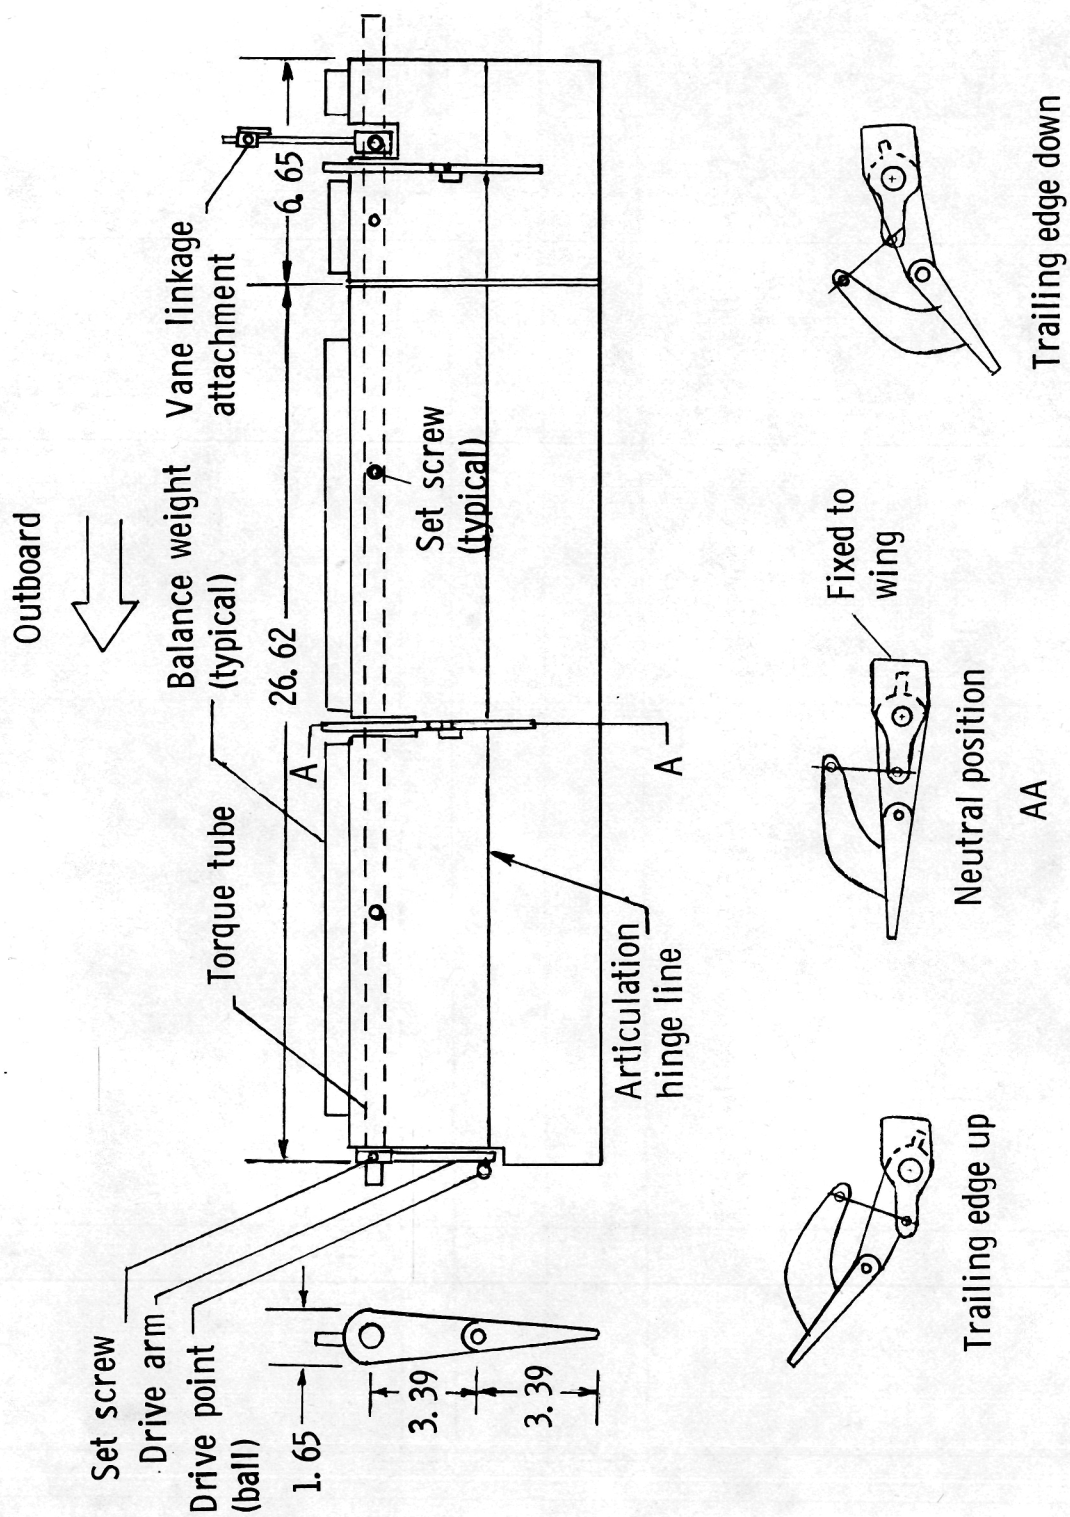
Detailed view of inboard flap. All dimensions are in cm.
